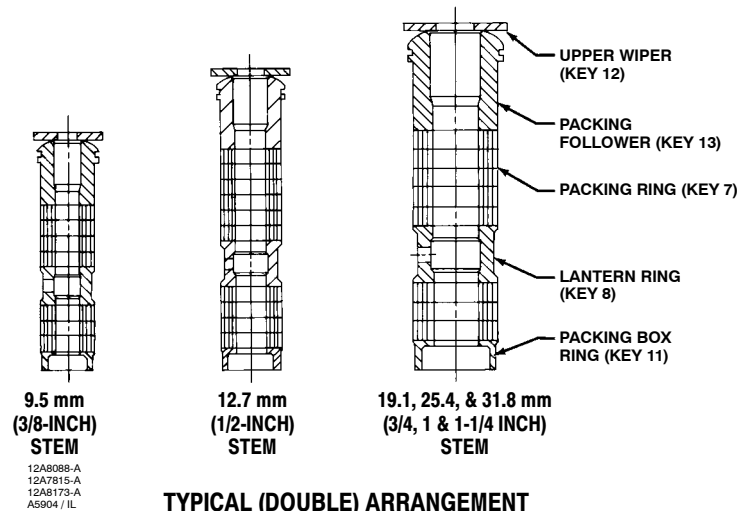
PTFE/Composition Packing Arrangements for Plain or Extension Bonnets
